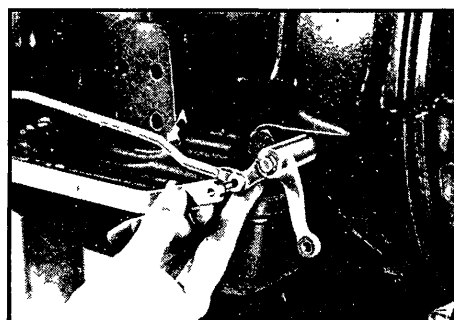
B Installing Throttle Valve Lever Adjusting Gauge PU-334 on relay lever
